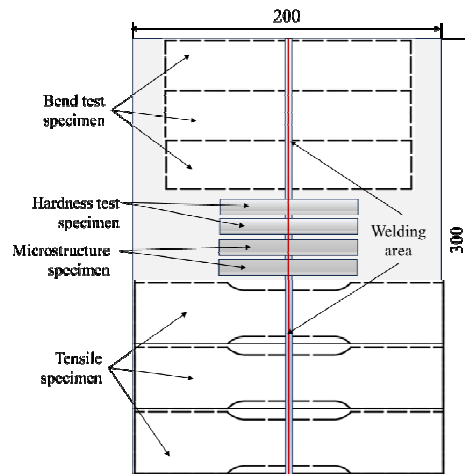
The schematic of the test coupon of aluminum AA6061-T6 was welded using TIG welding followed by artificial aging.
